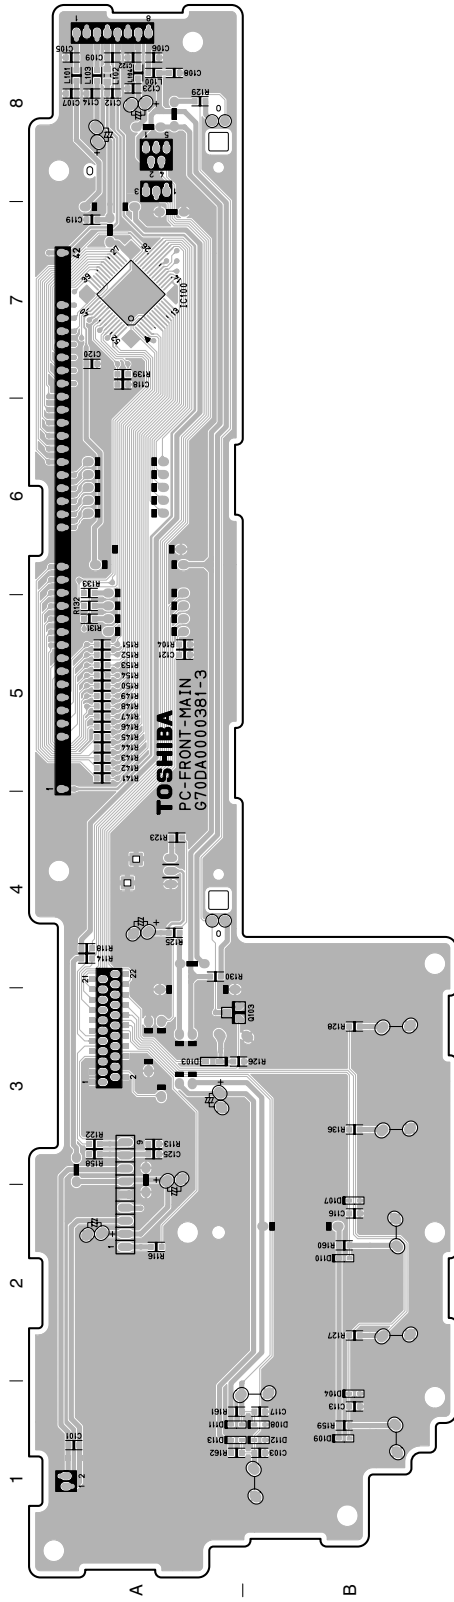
Front MAIN PC Board (Bottom side)
